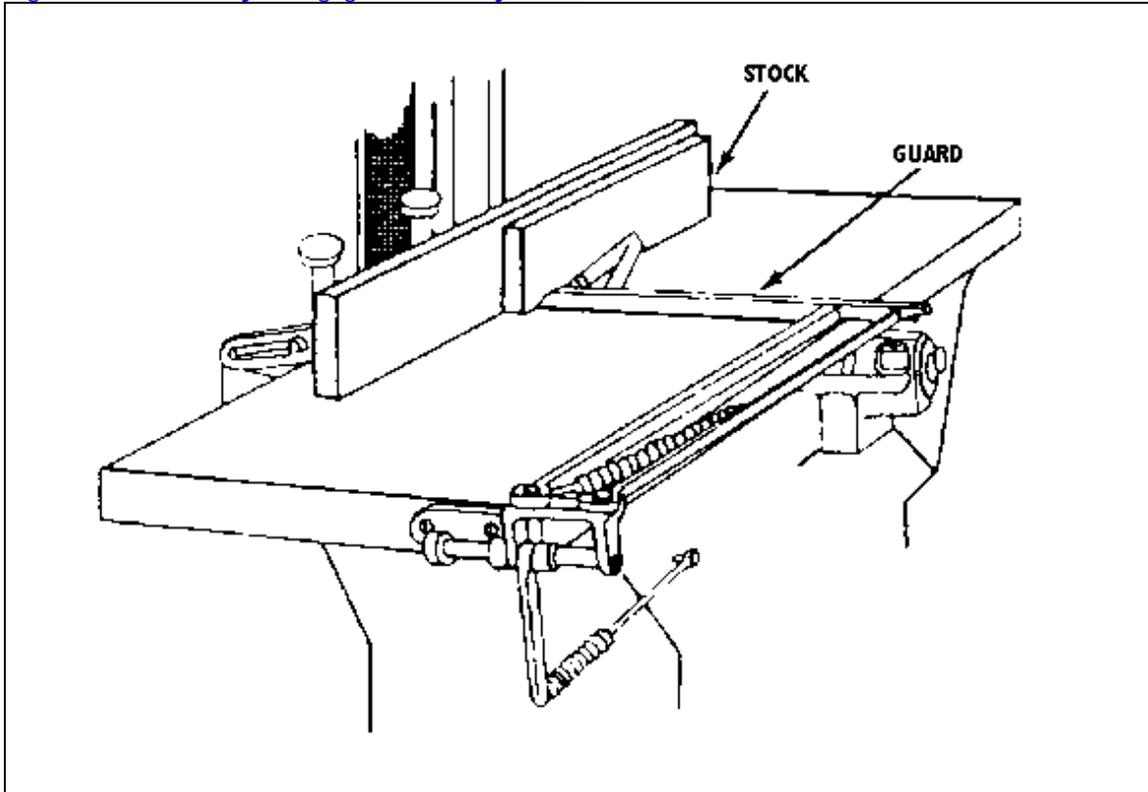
shows a self-adjusting enclosure guard mounted on a jointer. This guard is moved from the cutting head by the stock. After the stock is removed, the guard will return, under spring tension, to the rest position.
